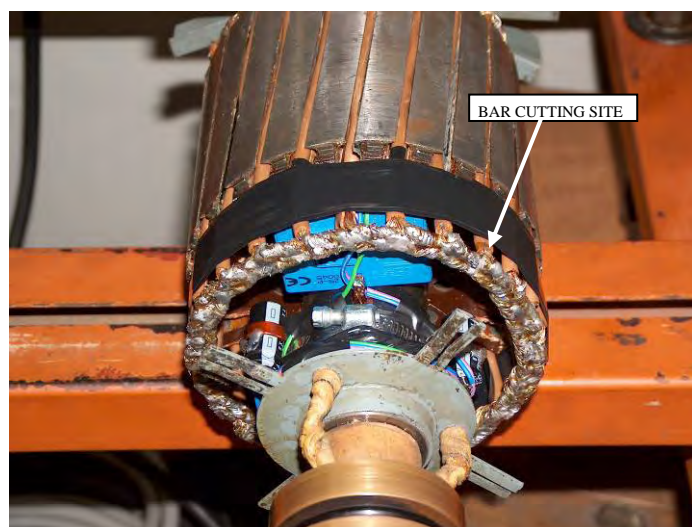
Rotor ready for mounting. The terminal part was taped with thermosetting tape for better containment of flexible cables.
